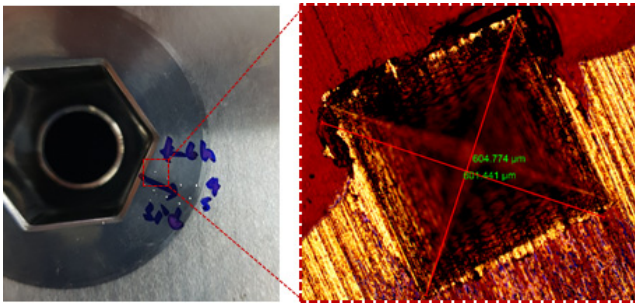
Photographs showing indentation on the surface of mold and indenter mark after indentation test
